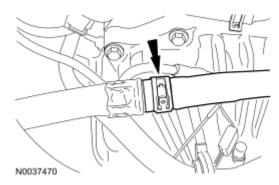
Locating Upper Radiator & Heater Hoses From Coolant Bypass Courtesy of FORD MOTOR CO.
